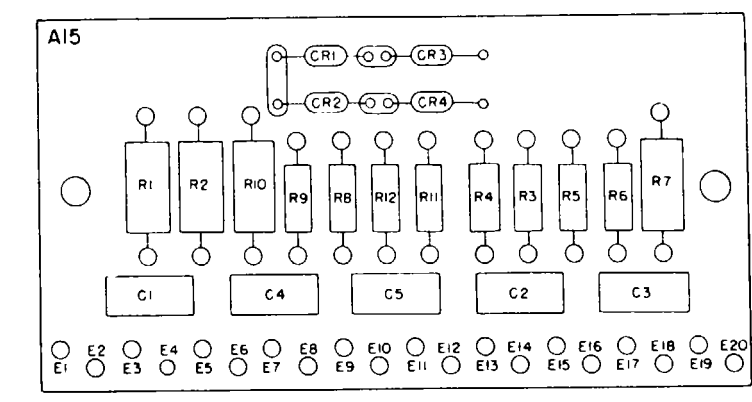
Component board assembly (PS1A15), component location diagram.
